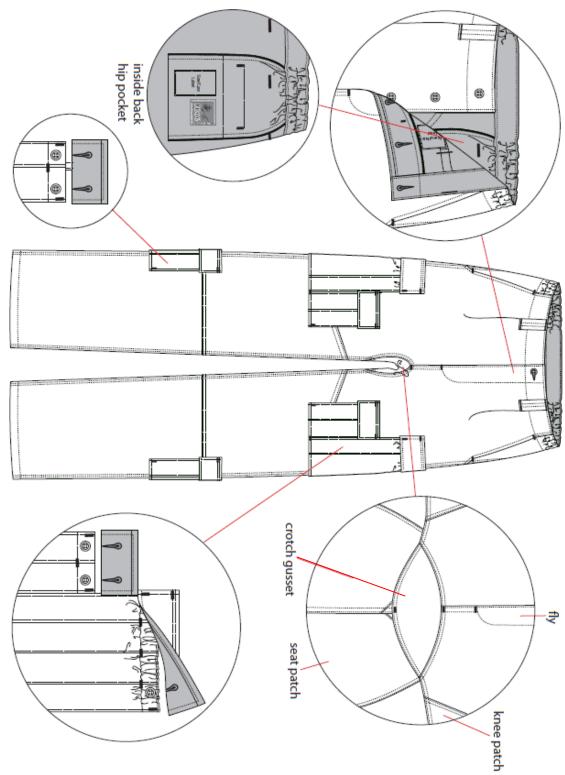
Trousers, Front View with pocket, crotch gusset, and label details
